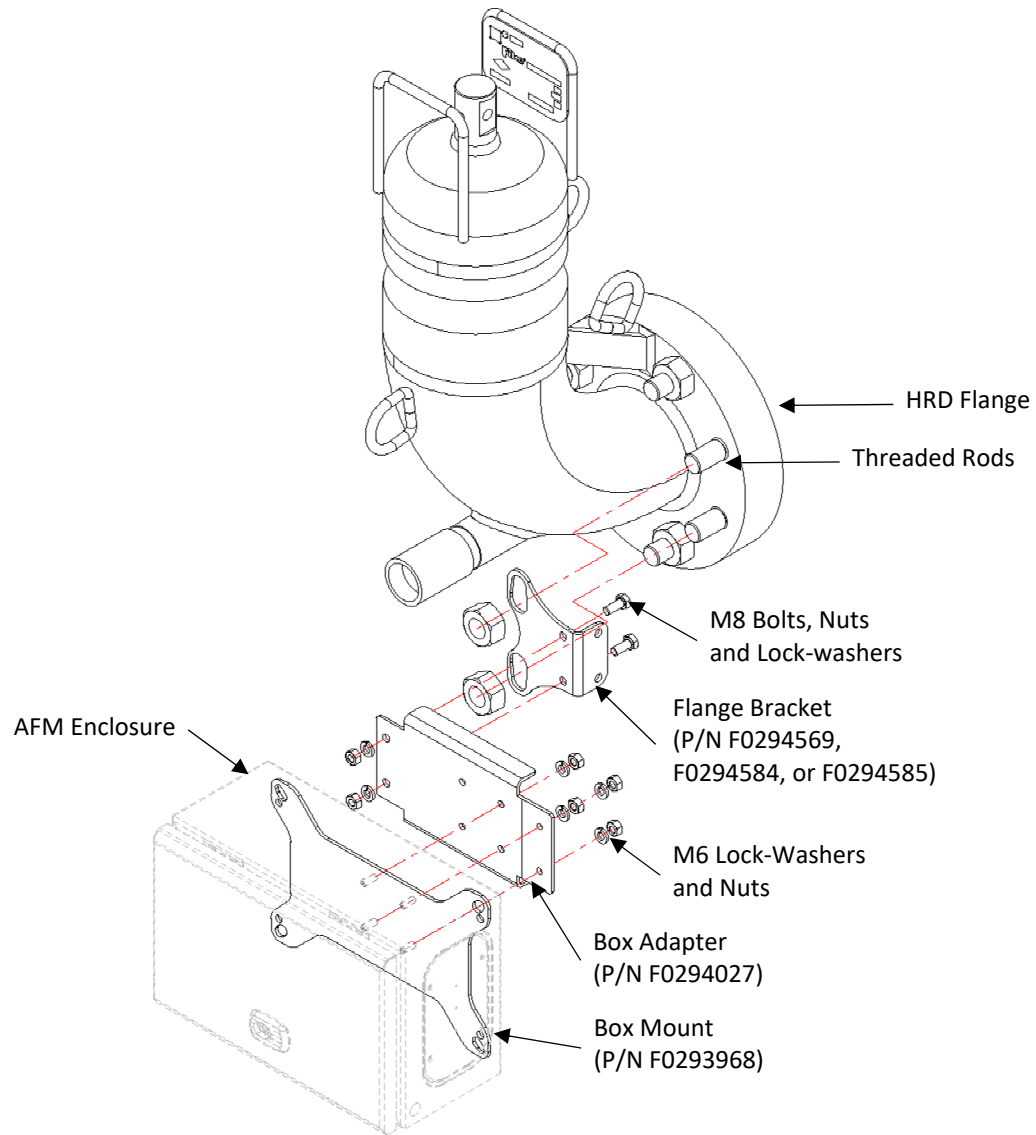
AFM Attachment to HRD Container, Perpendicular Mount
